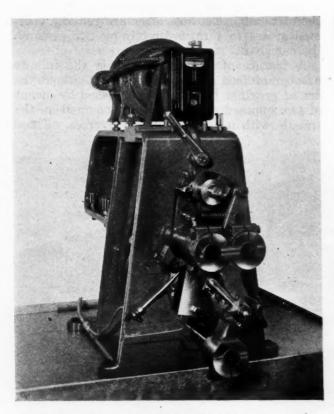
Front View of "Poly Choke" Automatic Screw Machine
